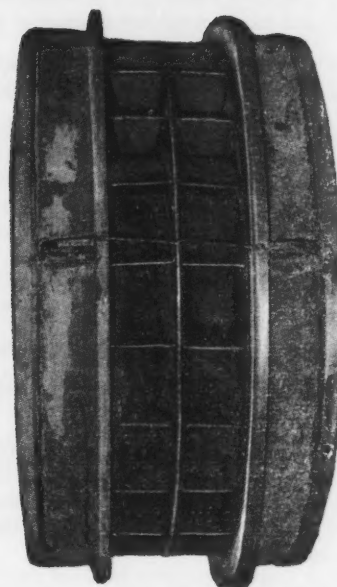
Assembly unit—universal diffuser combined with the rotor of the extractor.
